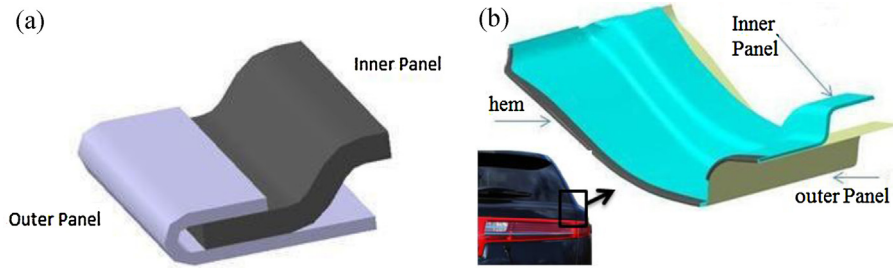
(a) Folded flange of outer panel over inner panel hem type, (b) a car panel with three dimensional curvature hem.
